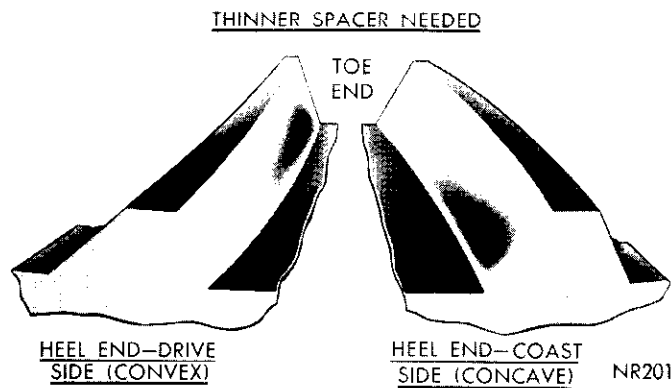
Incorrect Tooth Contact Pattern (Decrease Spacer Thickness)
